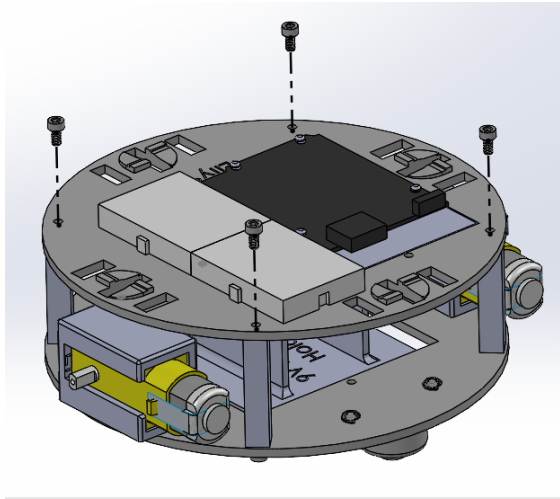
Attach the robot upper chassis to the bottom chassis with the 4 M3 8 mm machine screws and standoffs.
